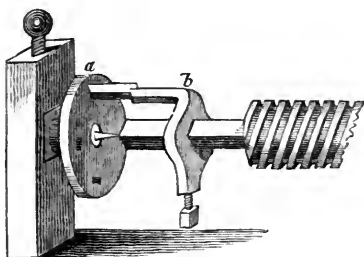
is a chuck or disc of iron which may be screwed upon the spindle nose for the purpose of hold-
